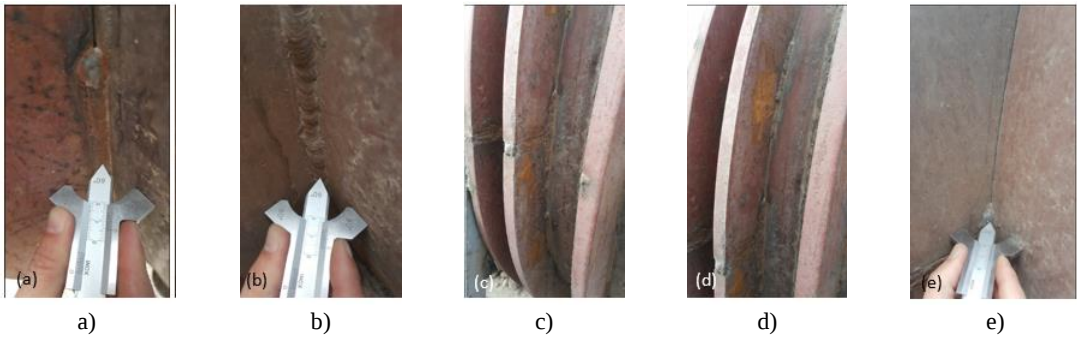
External ribbing weld for the duct (a-e)
